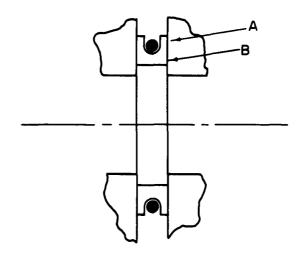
EXTERNAL-EXPLOSIVE SEAL
